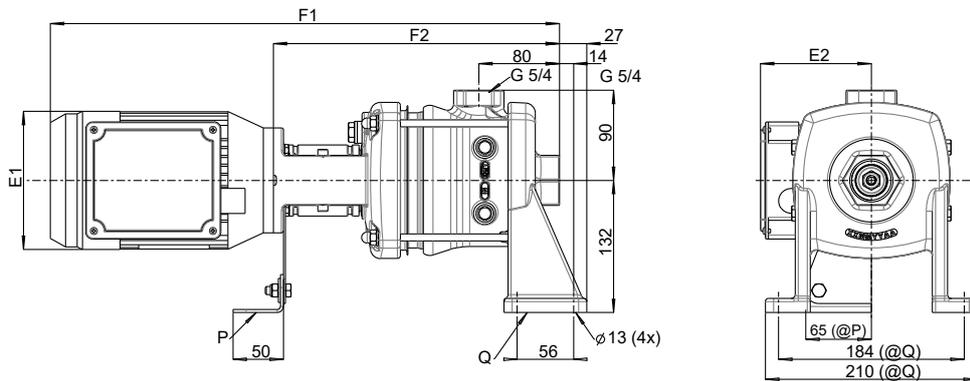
Dimensions and connections of DPH(S)I 2 with V18 motor⁴⁾
